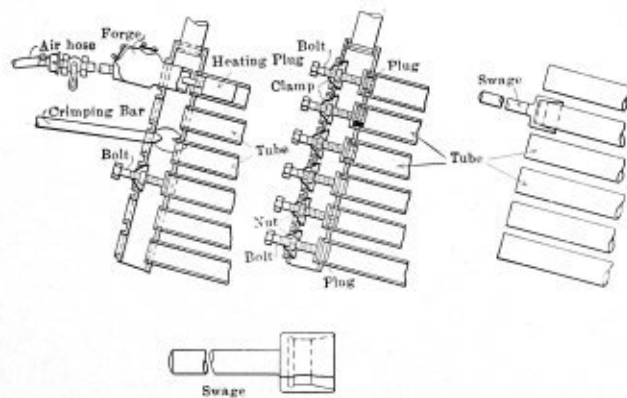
Tools Used for Replacing Wrought Steel Headers
